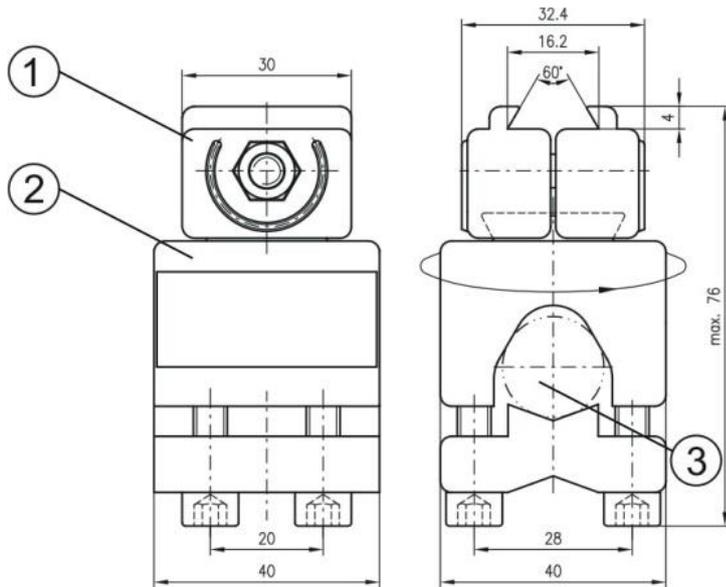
Dimension drawing BE 901 FA-002 mounting device (all dimensions in mm)
